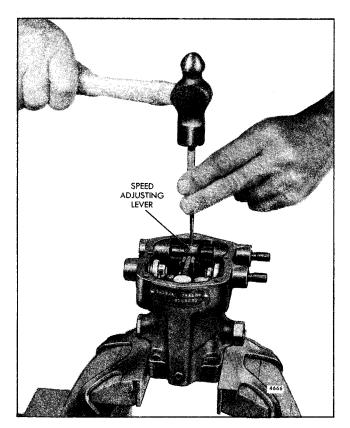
Removing Speed Adjusting Lever Roll Pin
